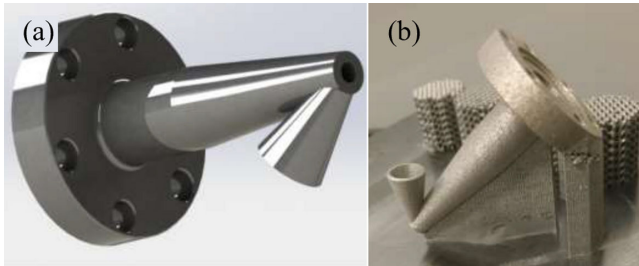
(a) CAD model and (b) photograph of the additively manufactured beam exit snout of the MACHINA transportable accelerator [222].
